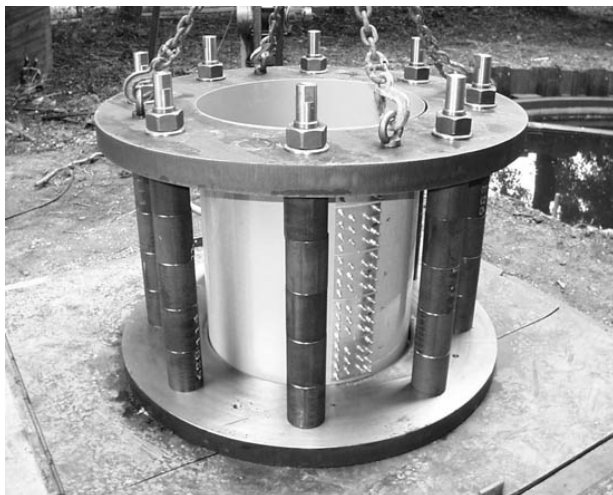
A closed outline billet and equipment for its dispensing by explosion
